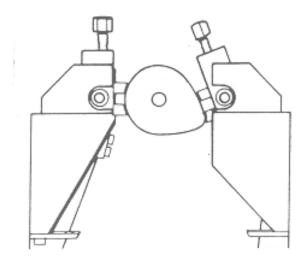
Tool Carrier for Stone Superfinishing.
